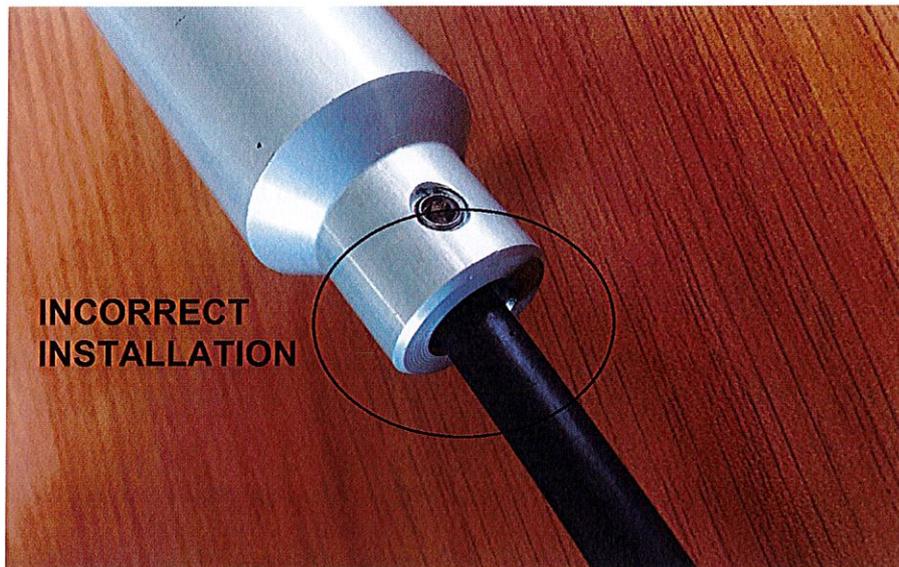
shows no steel end piece protruding and indicates an incorrect installation.
